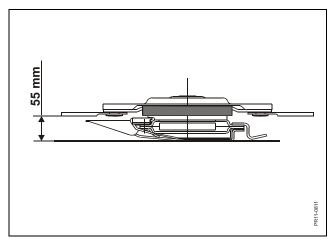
A machine in horizontal position has a theoretical cutting height of 55 mm.
